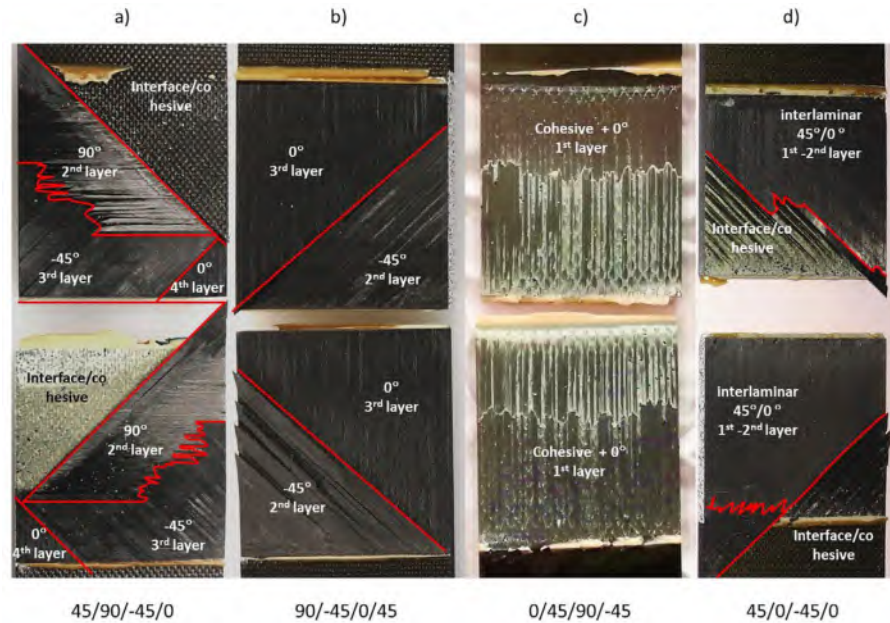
Fracture surfaces of single lap joints with different layups [42]
